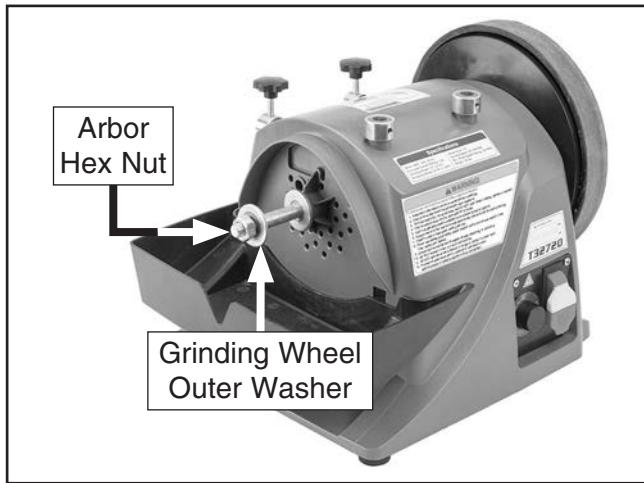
Location of grinding wheel arbor hex nut and outer washer.
